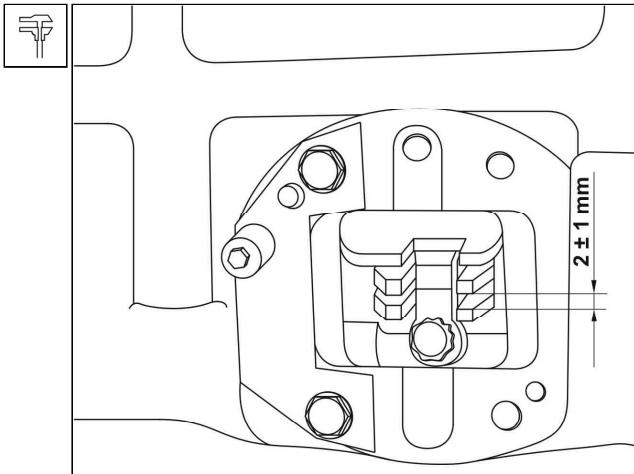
Adjustment of the gearshift mechanism clearance
